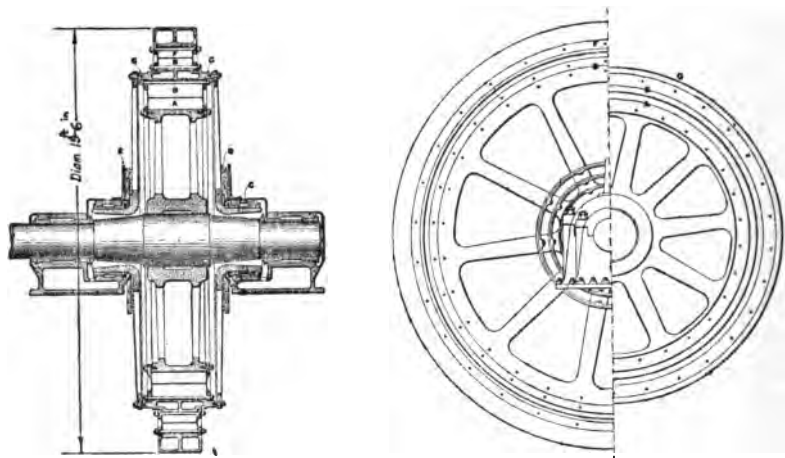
Three-Speed 5400-h.p. Spinner Motor.
